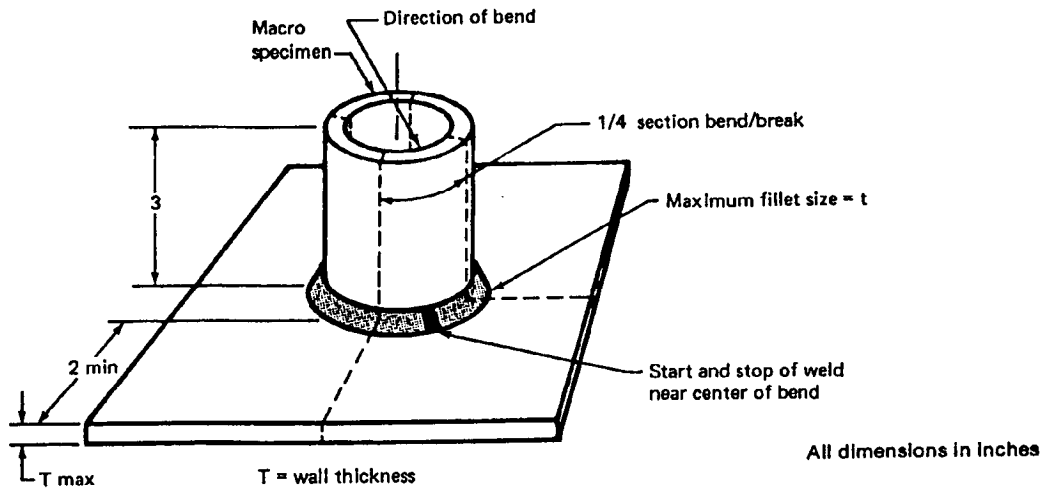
Standard Fillet Weld Test Weldment, Pipe
